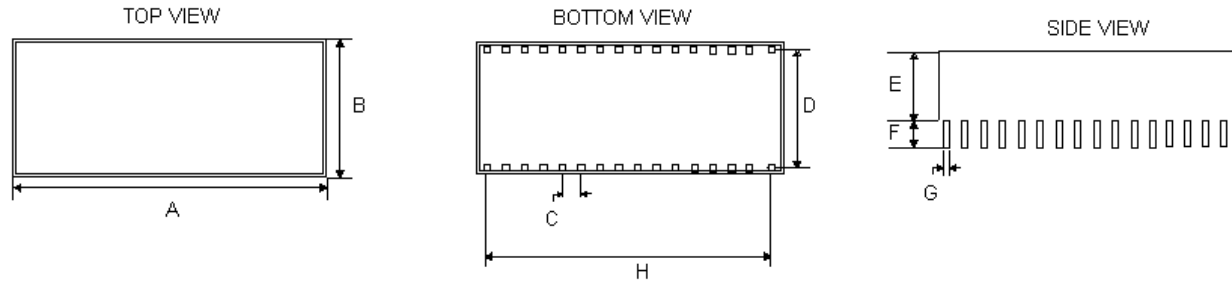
Mechanical Dimensions of DiskOnChip Millennium Module
